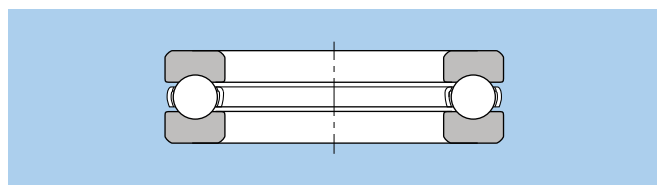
Single direction thrust ball bearing (with pressed cage)
